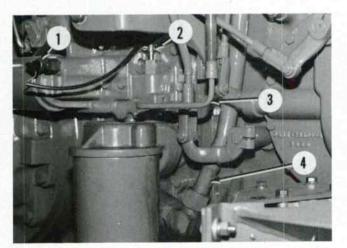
Disconnect points when splitting tractor between rear axle center housing and transmission housing.
